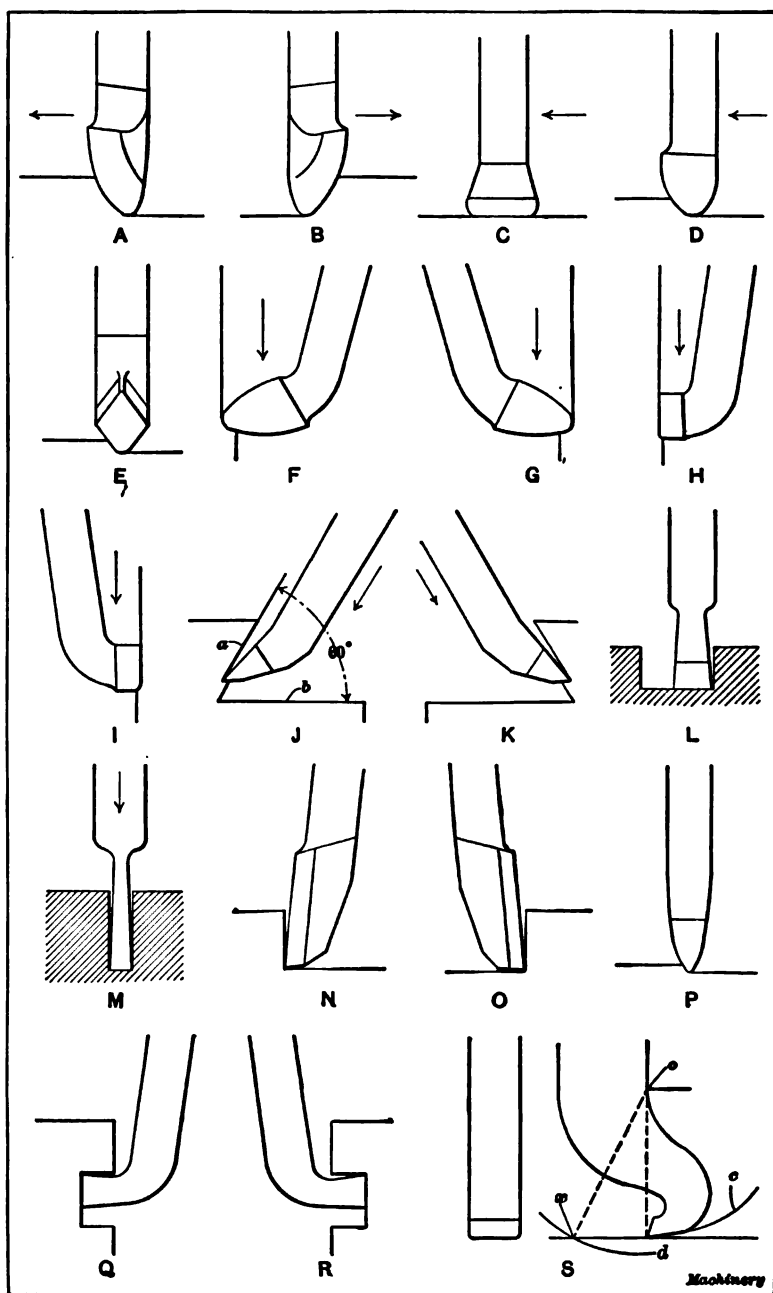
Planer Tools of Different Form and Operations for which They are Adapted
